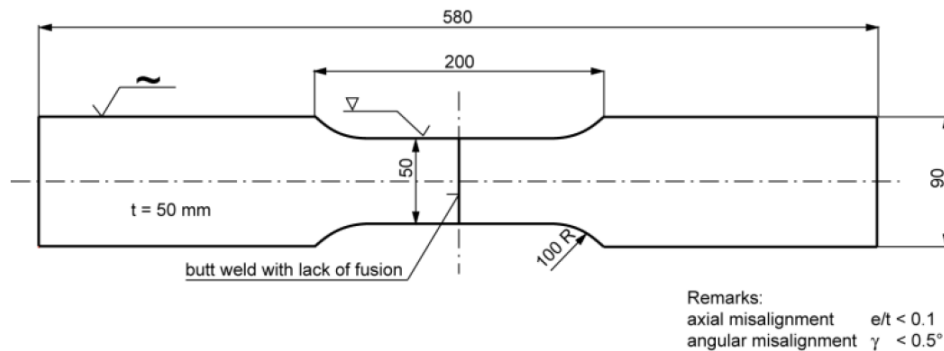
Dimensions of Specimen (DNV GL 2015)
